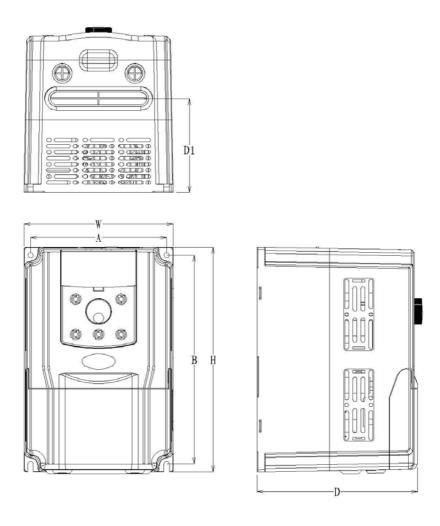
Schematic Diagram for Physical Dimensions and Mounting Dimensions
